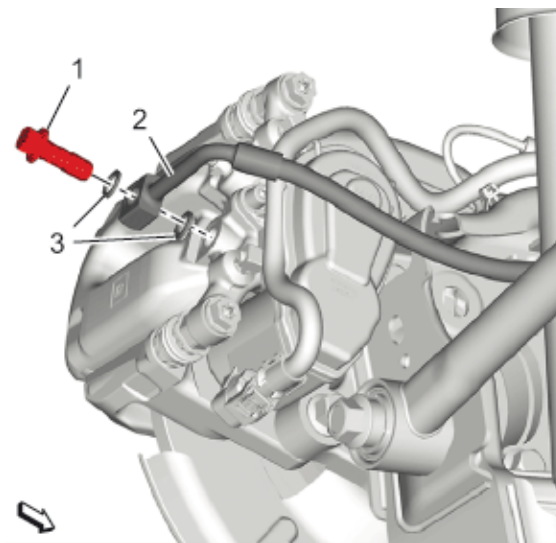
Brake Hose, Fitting Bolt And Sealing Washers
